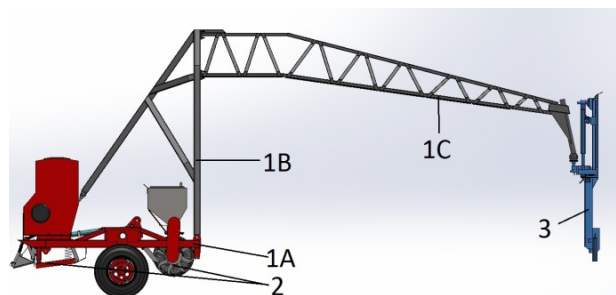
Machine design, 1 structural elements, 2 working elements, 3 support element
